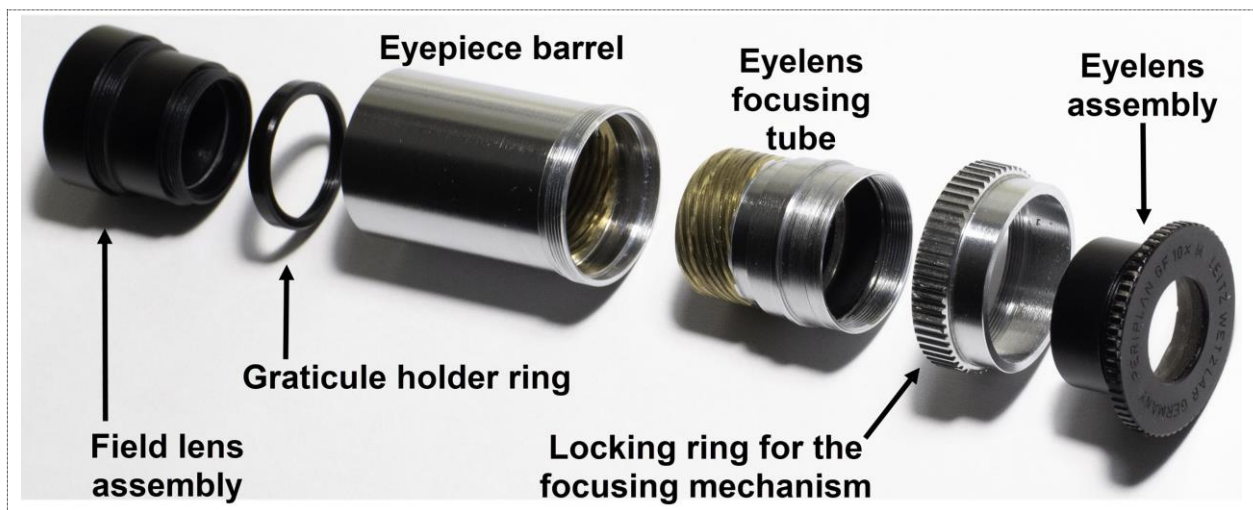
Exploded view of the Leitz Periplan GF 10x M eyepiece.
